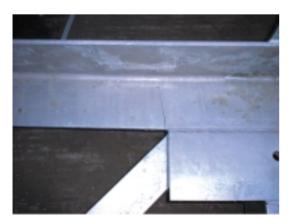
Crack initiating from weld (Courtesy of Mr. W Smith, Galvanizers Association)
